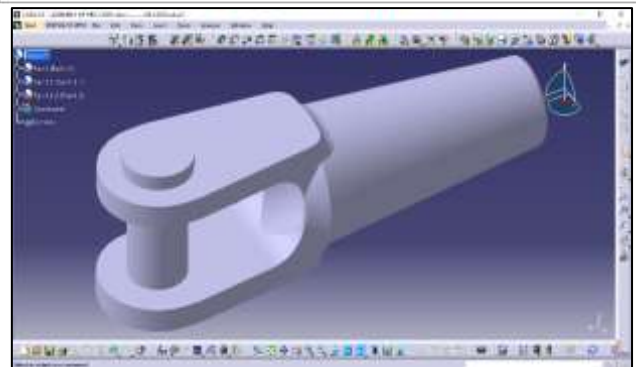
CAD File of Assembled Body of Haulage Rope Cappel
